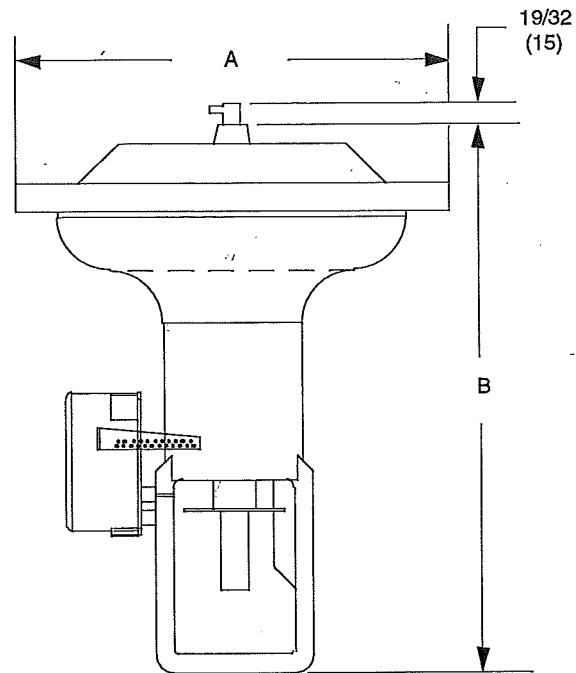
V-400 and V-500 Actuator Dimensions, in. (mm), Shown with Optional Positioner
